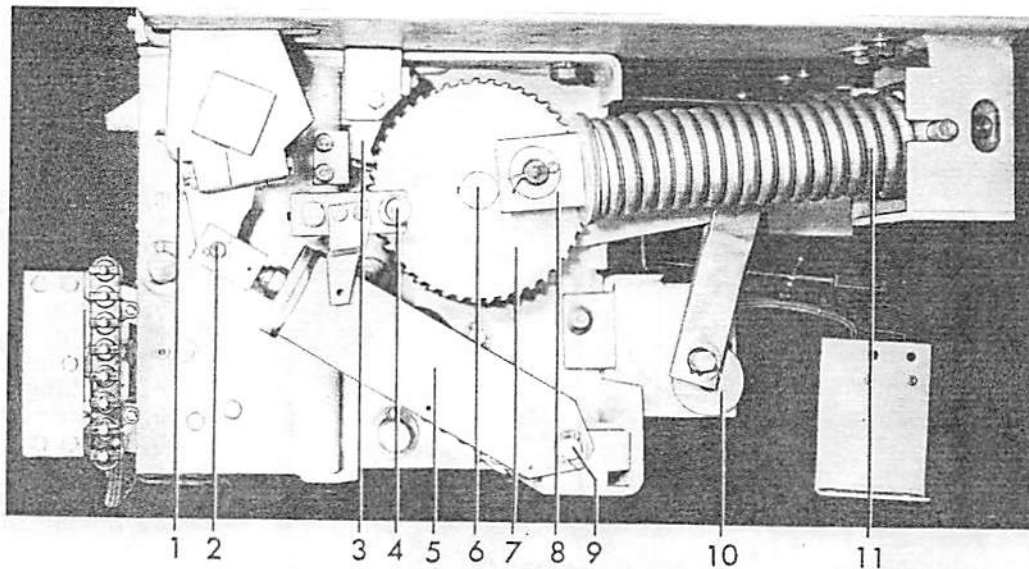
(8037377) Left Side View ML-13A Operating Mechanism
